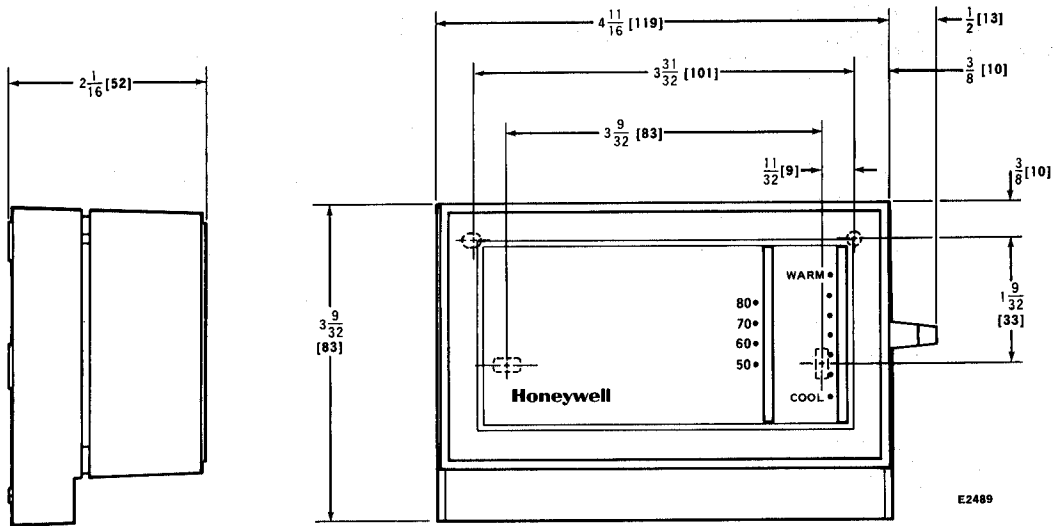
DIMENSIONS OF T641A,B IN in. [mm IN BRACKETS].
